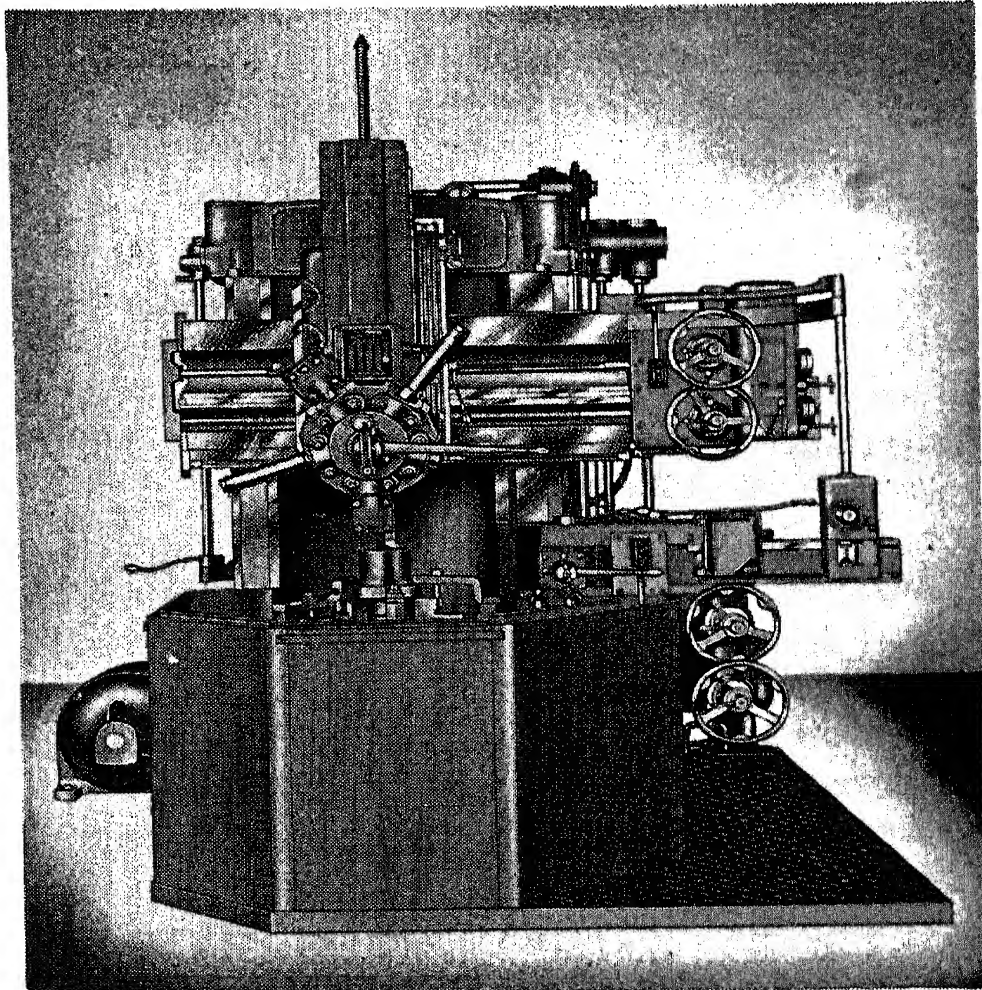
A 36 in. vertical turret lathe. (Courtesy The Bullard Co.)
